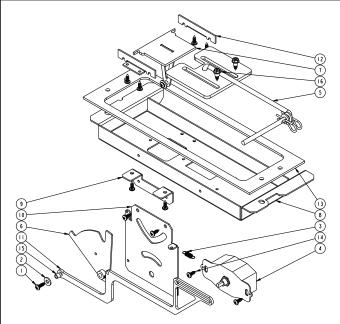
Exploded View of Entire Assembly for Point of Reference only
